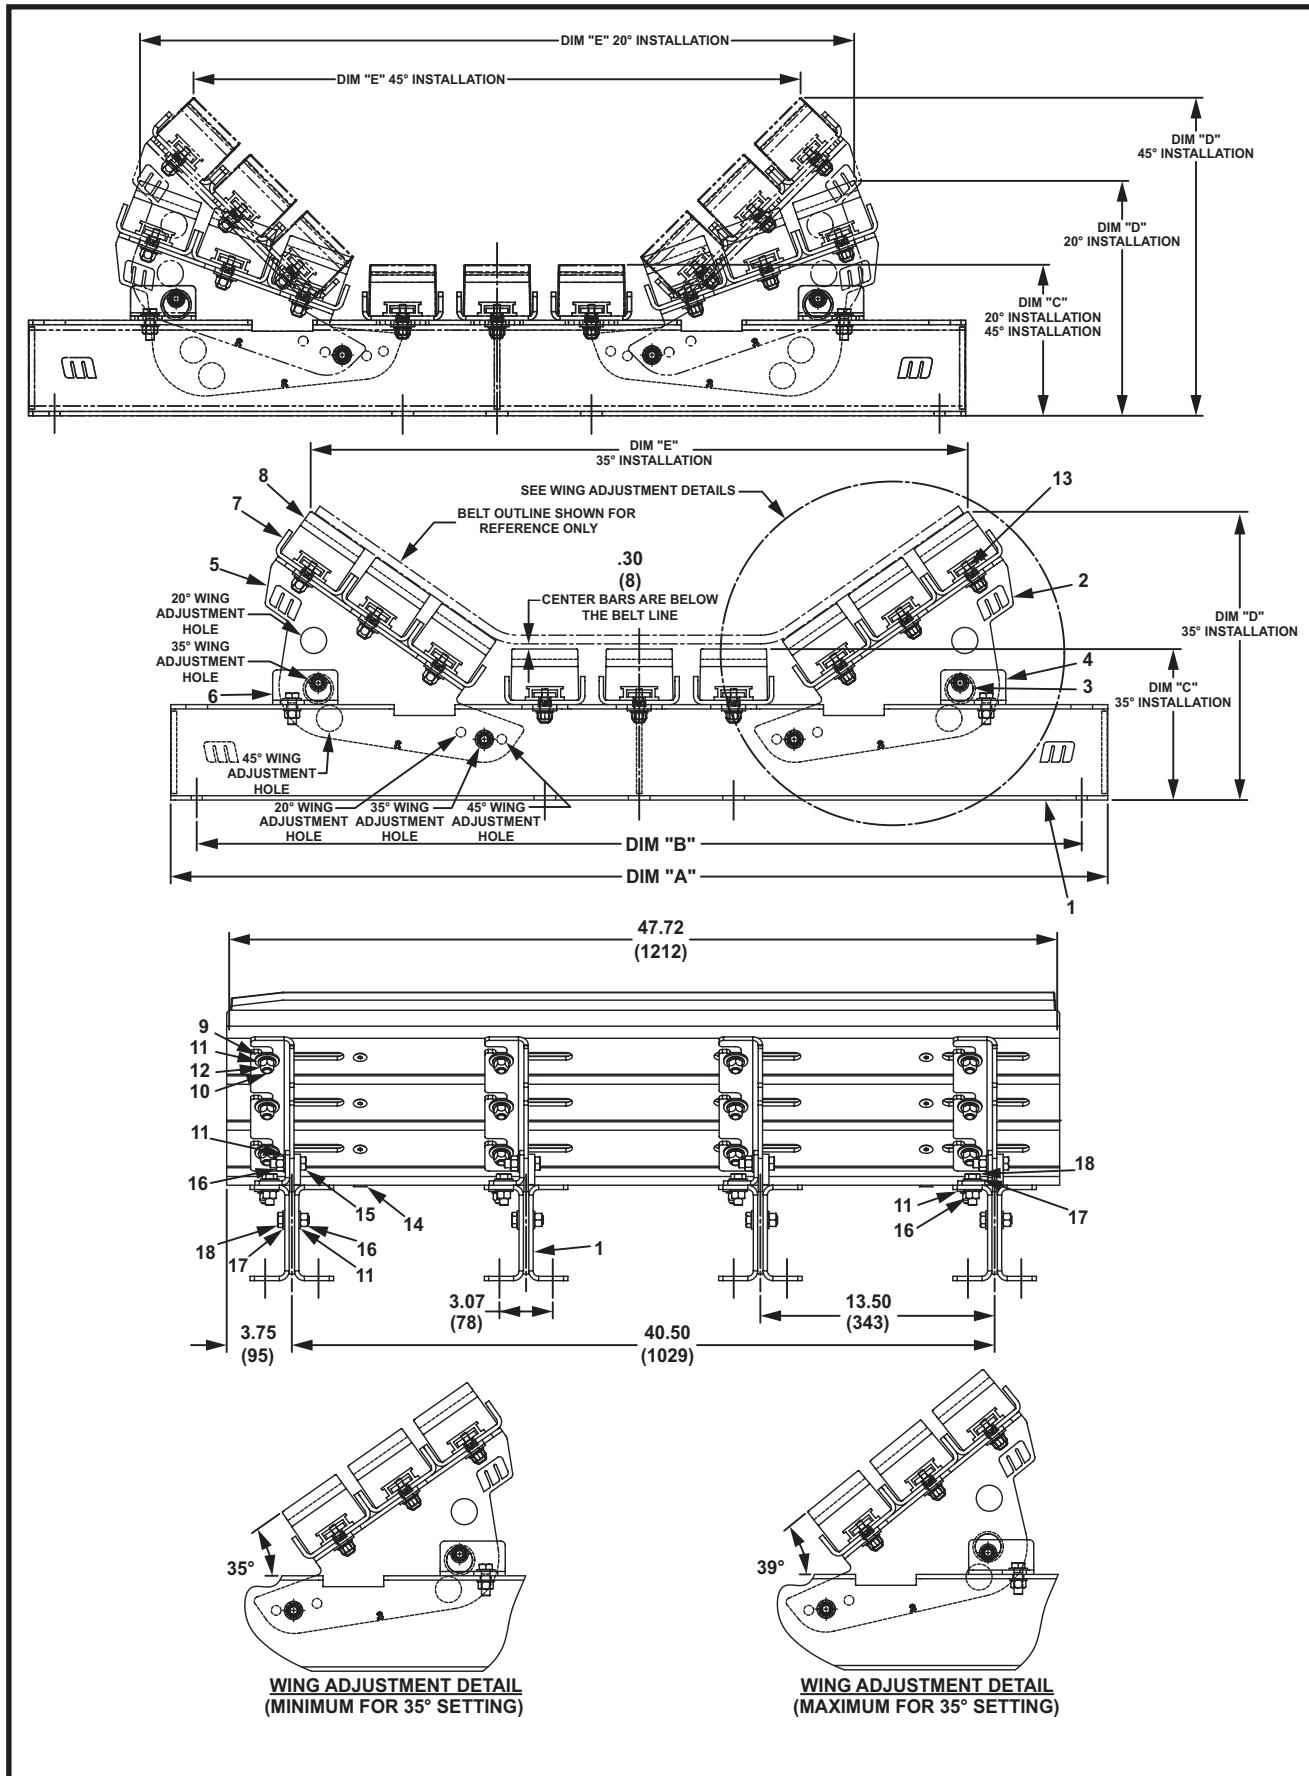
Martin® Impact Cradle MD Assembly, P/N 36318-XXX (Sheet 1 of 2)
